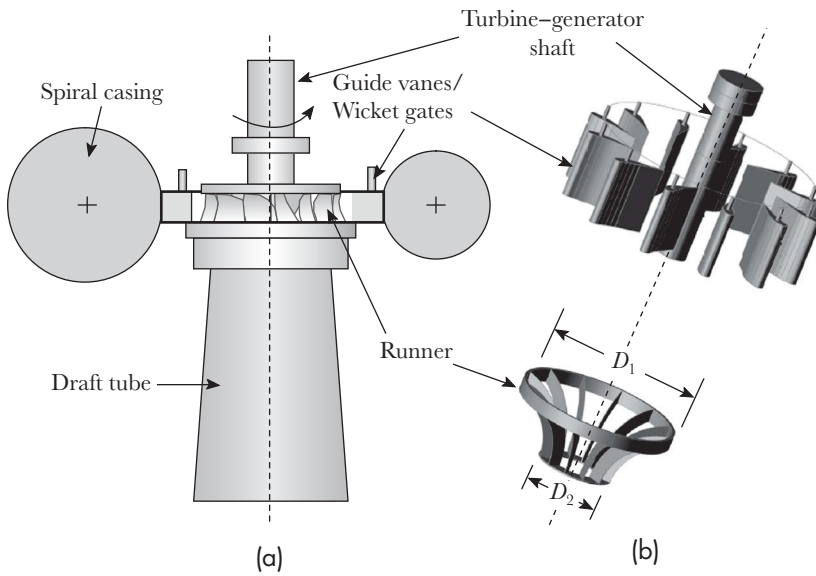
Francis turbine (a) Schematic diagram (b) Exploded view
